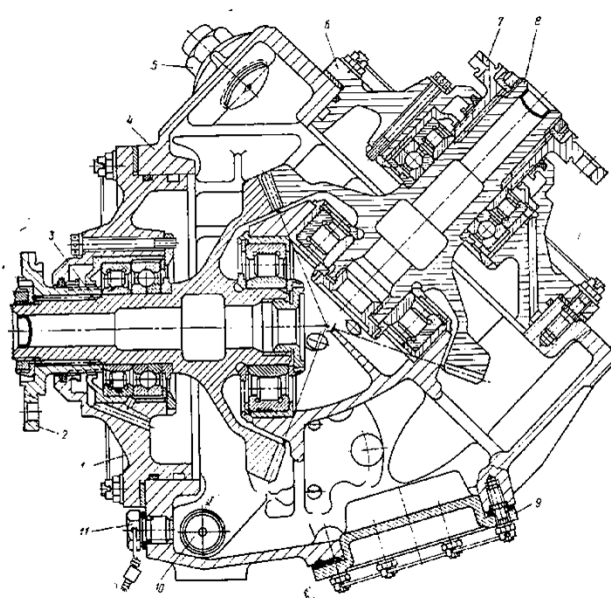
Main gearbox VR-8 of the helicopter [ 7 ].
